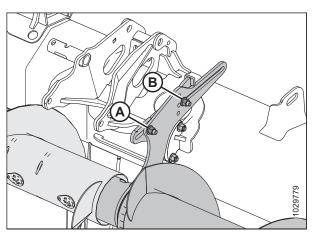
Initial Position of Adjustable Mounts – Three-Piece Auger
